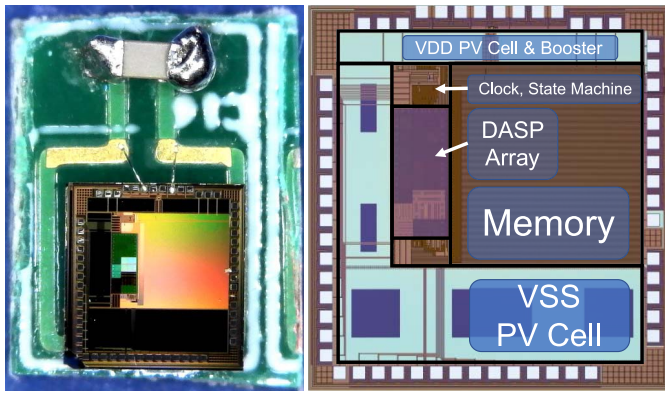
Die-PCB assembly and Die Photo. The die measures 2.25 mm x 2.4 mm, and the PCB platform measures 4 mm x 5 mm. The complete assembly weighs 26 mg, 80% of which is constituted by the PCB. Downsizing the system is an area of future work.
